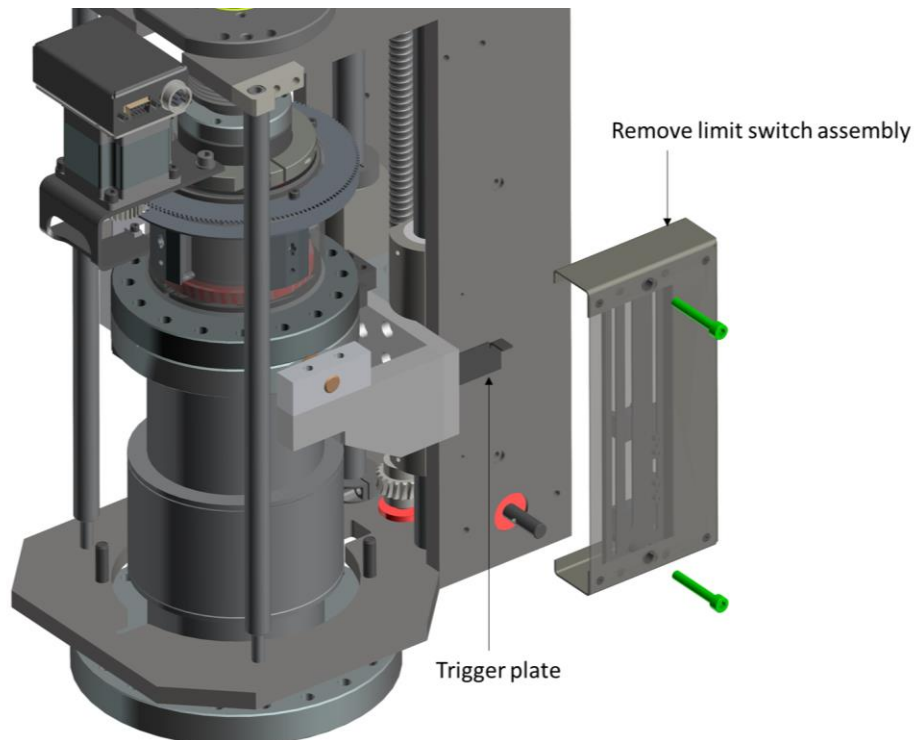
Schematic showing the removal of the limit switch assembly (manual transfer system).
